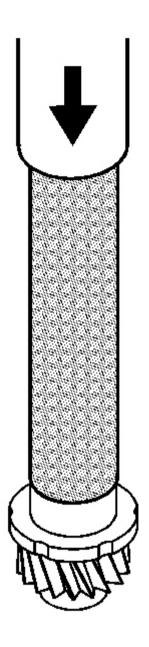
Identifying J 24433 Courtesy of GENERAL MOTORS CORP.
